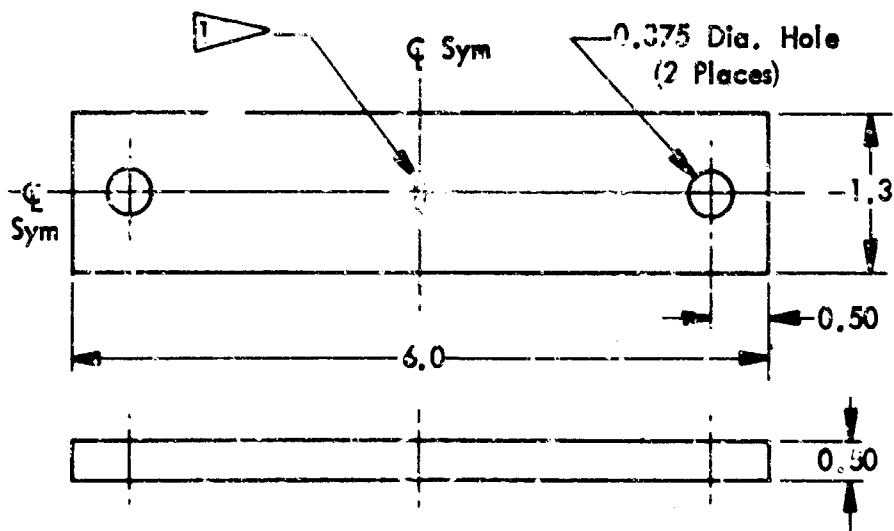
TYPICAL BEND SPECIMEN ASSEMBLY FOR PHASE I TESTING
